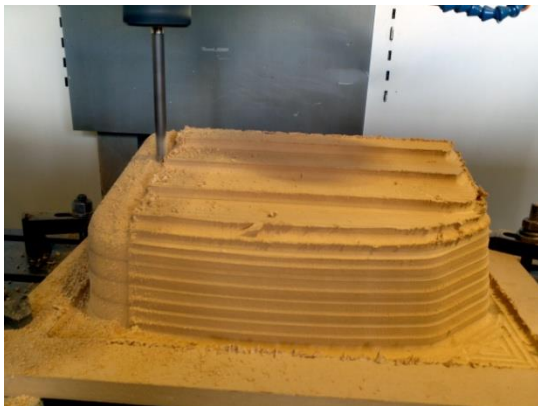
Machining the front bulkhead plug from the MDF stock on the TM1.
